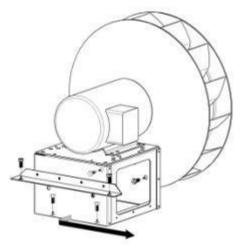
Bolts which Connect Motor Mount to Blower Fan
